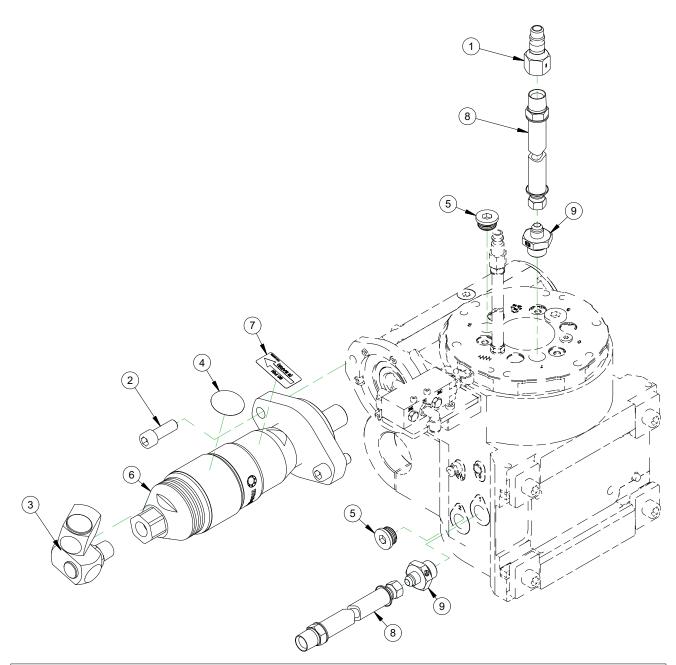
OD MOUNT ASSEMBLY 38-63" (965-1,600 MM) PARTS LIST (P/N 80477)
